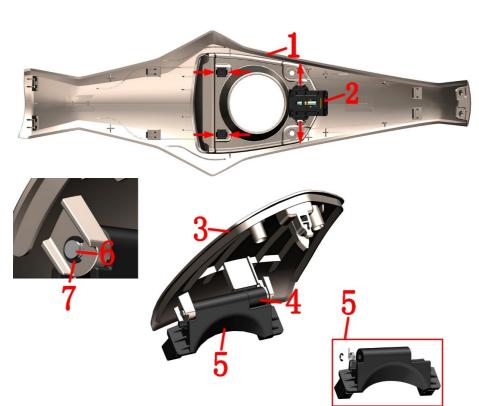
F	UEL TANK	Fuel tank lock fuel tank cover component	CHK	(0)
